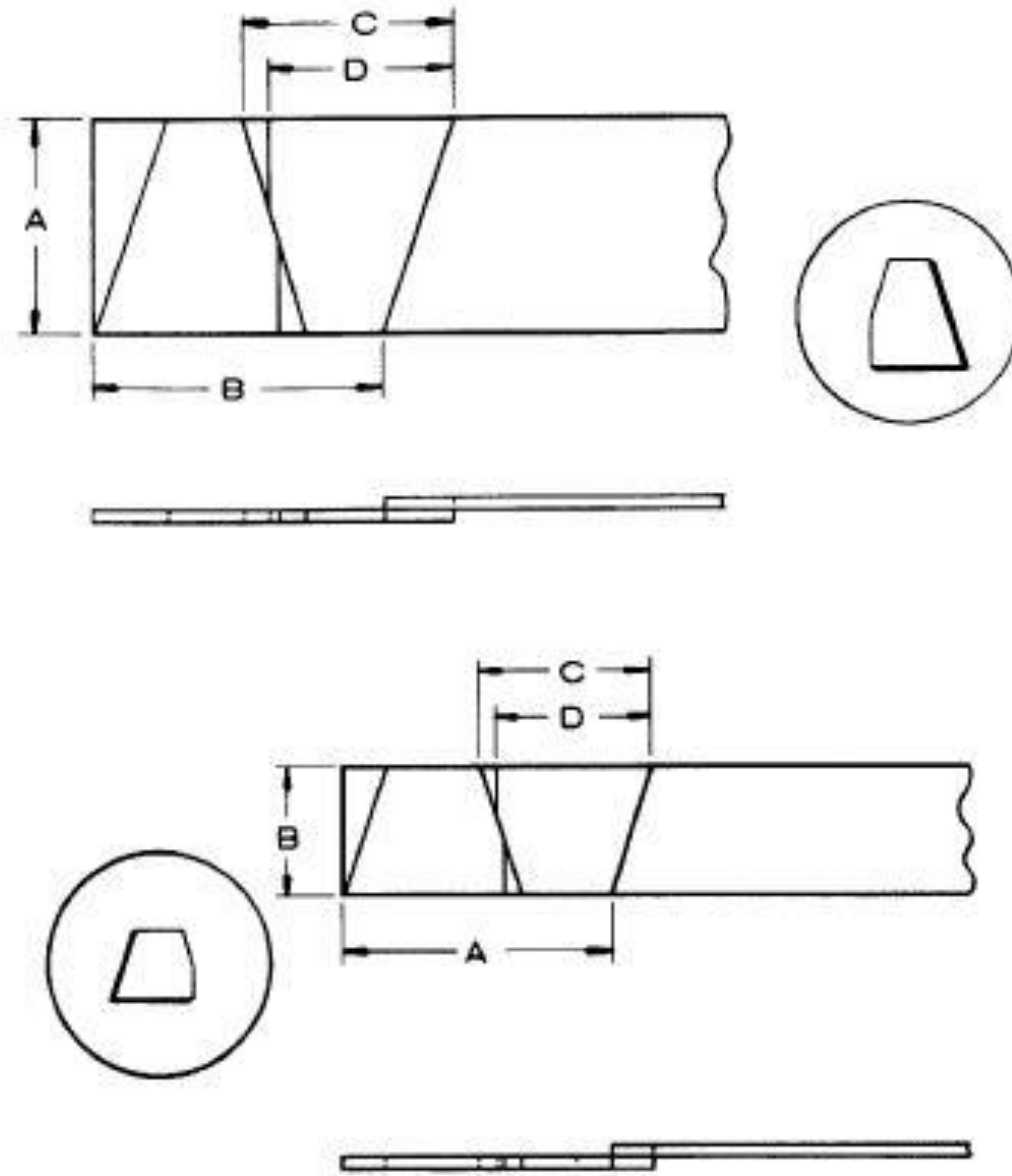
Blanks produced by added cutting of trapezoidal blanks.
